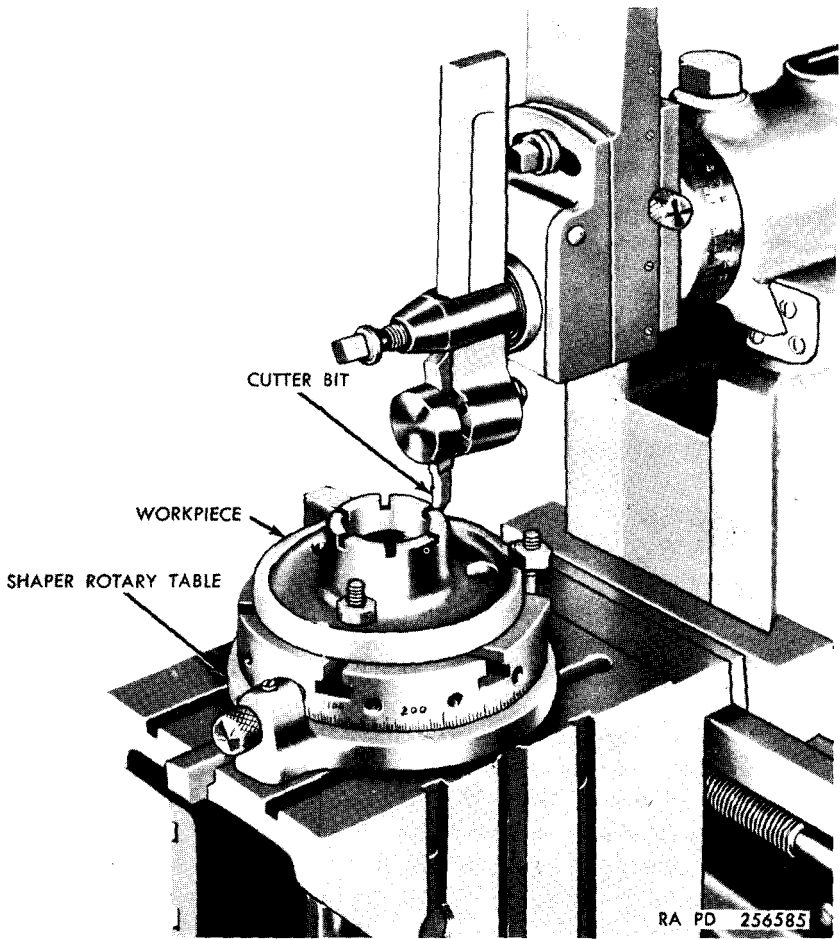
Slotting operation with workpiece mounted on shaper rotary table.
